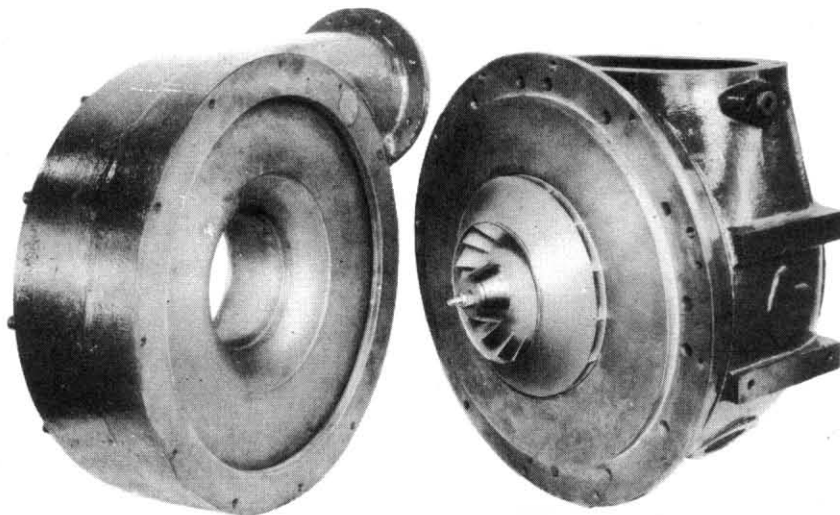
Partially Dismantled View Showing Blower End Sub-Assembly with Vaneless Diffuser and Turbine and Intermediate Casing Assembled with Rotor.
